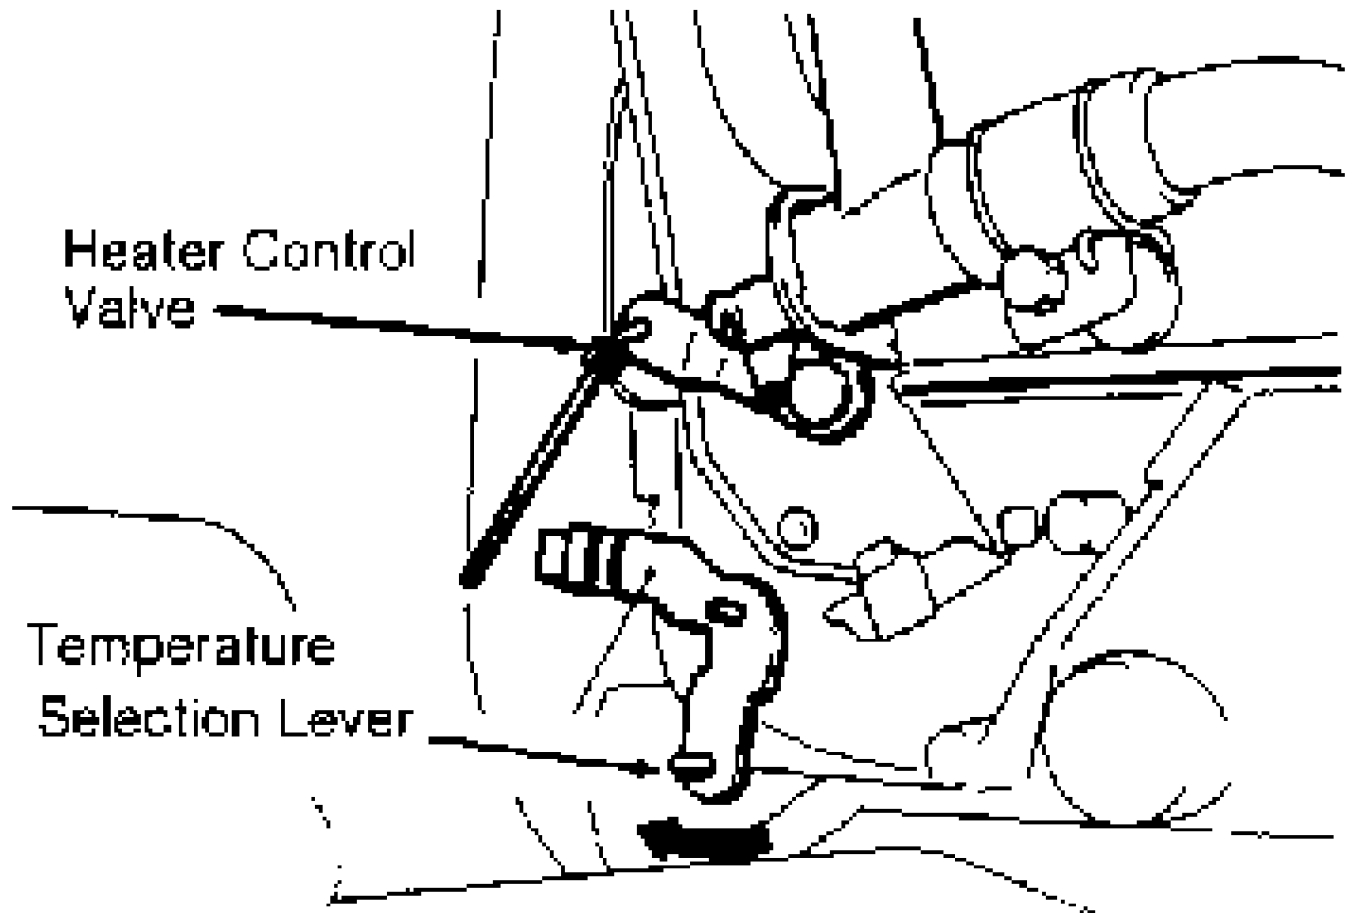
Adjusting Temperature Selection Cable (Montero)
